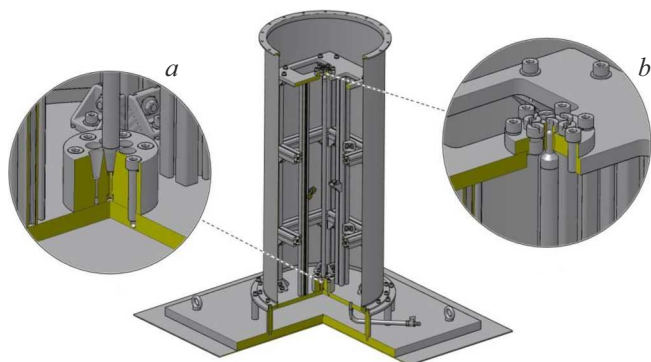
Fuel element vibration test bench drawing: *a* — bottom attachment, *b* — top attachment.
